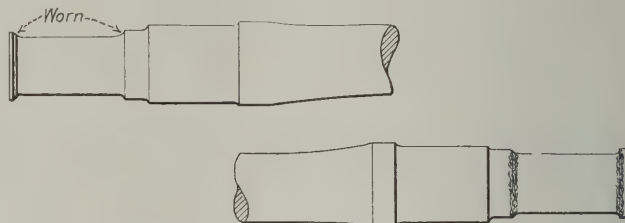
Building Up Worn Axle Collars; Electric Welding
